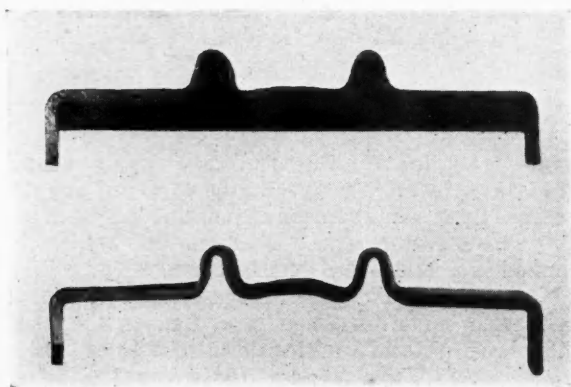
Cross-sections of the "Centrifuse" brake ring before and after centrifusion, showing in the upper cut the close bond between steel and iron
